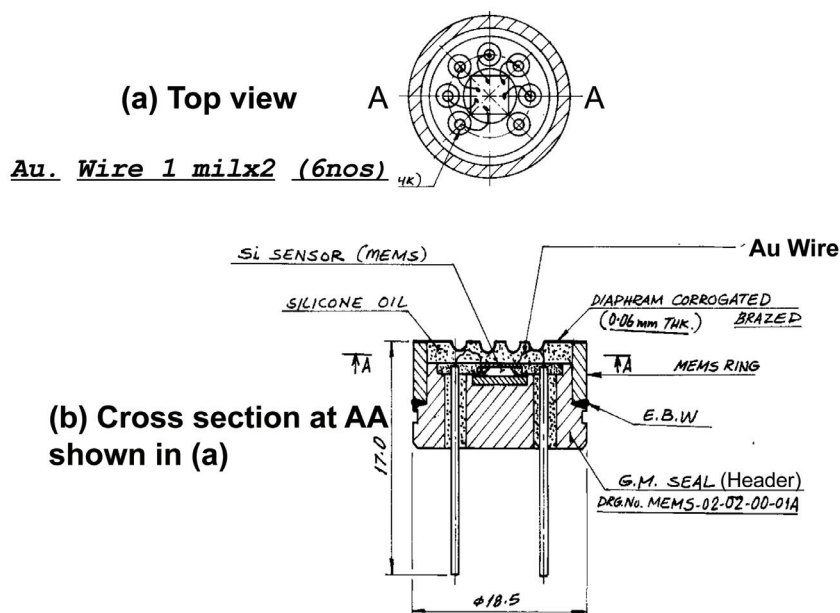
Oil filled packaging scheme with stainless steel diaphragm. The wire bonded die mounted on the header is protected against corrosive media by the silicone oil between silicon die and the steel diaphragm.
